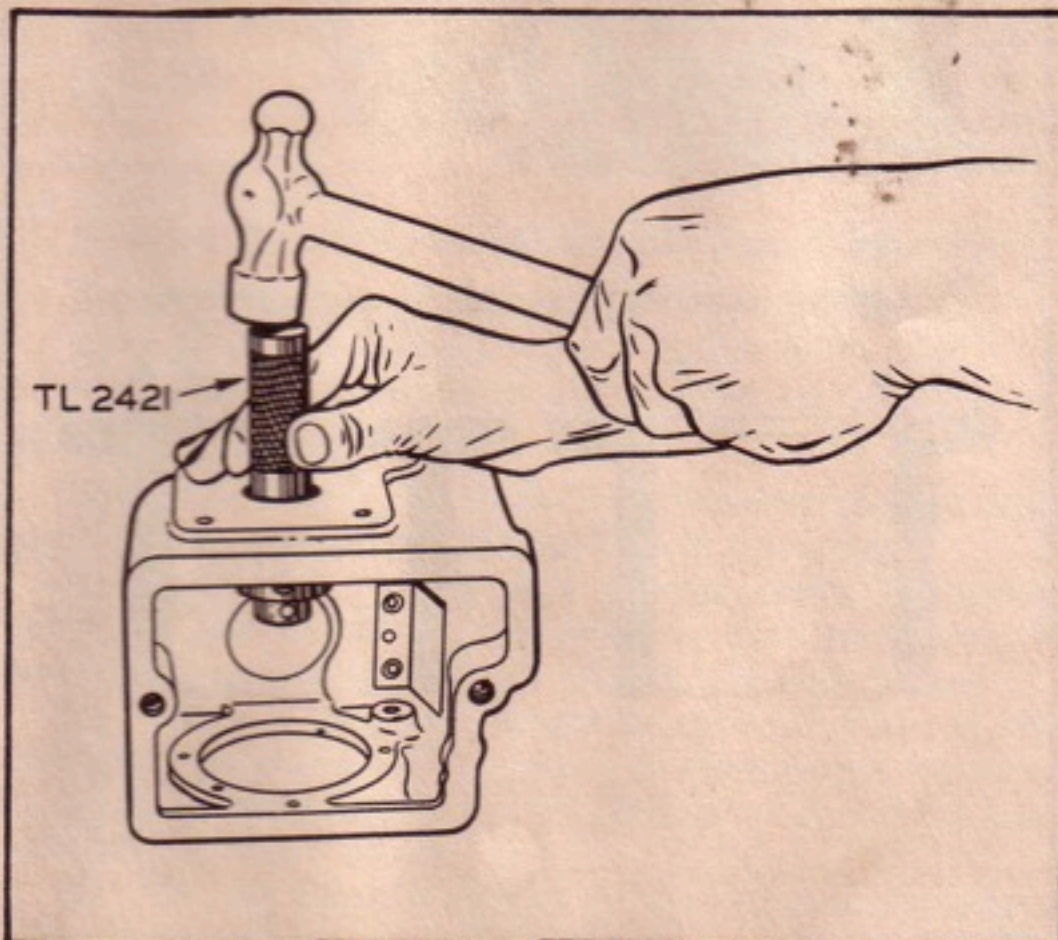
Driving Crankshaft Bearing Out of Cylinder Block
